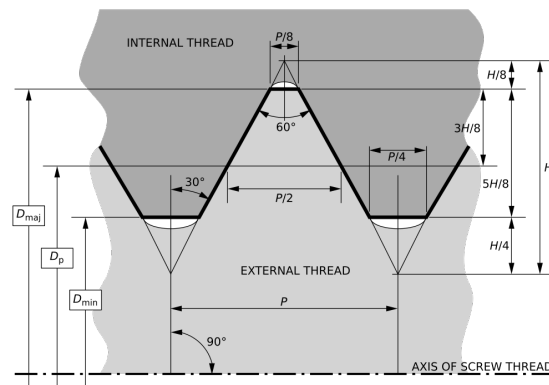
ISO and UTS Thread Dimensions diagram [16]
